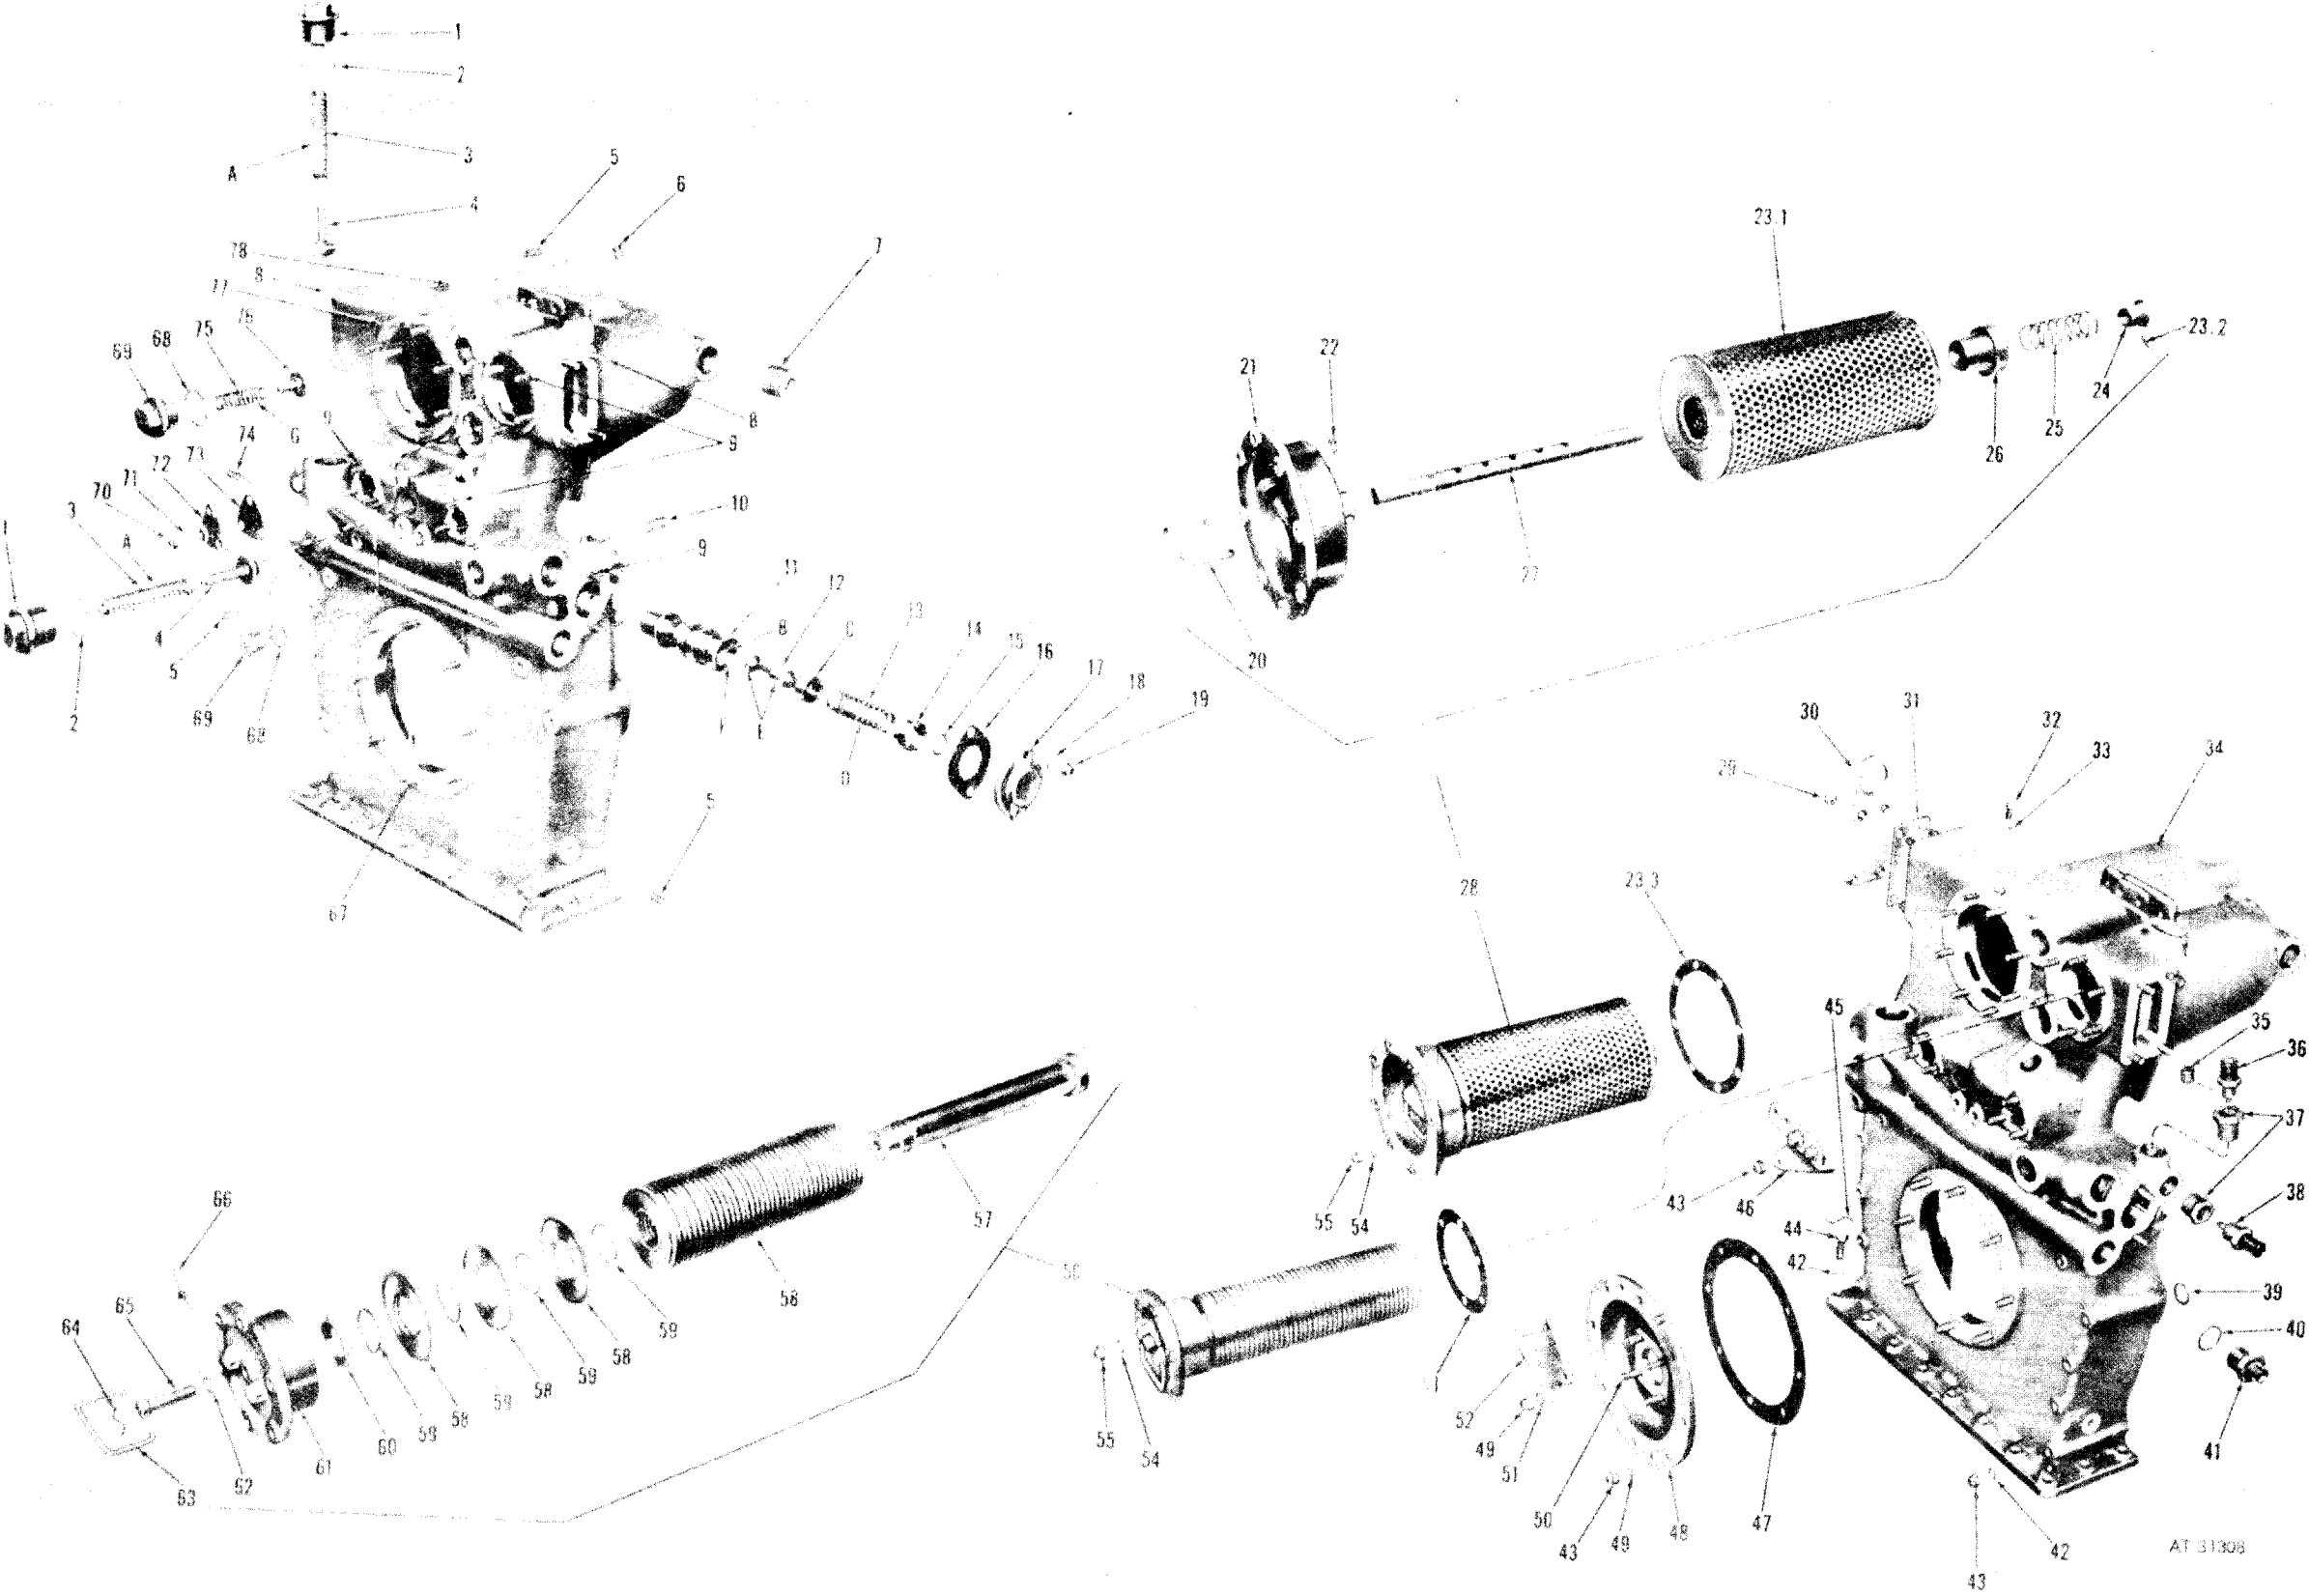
Damper Housing, Oil Filters and Associated Parts-Exploded View.
